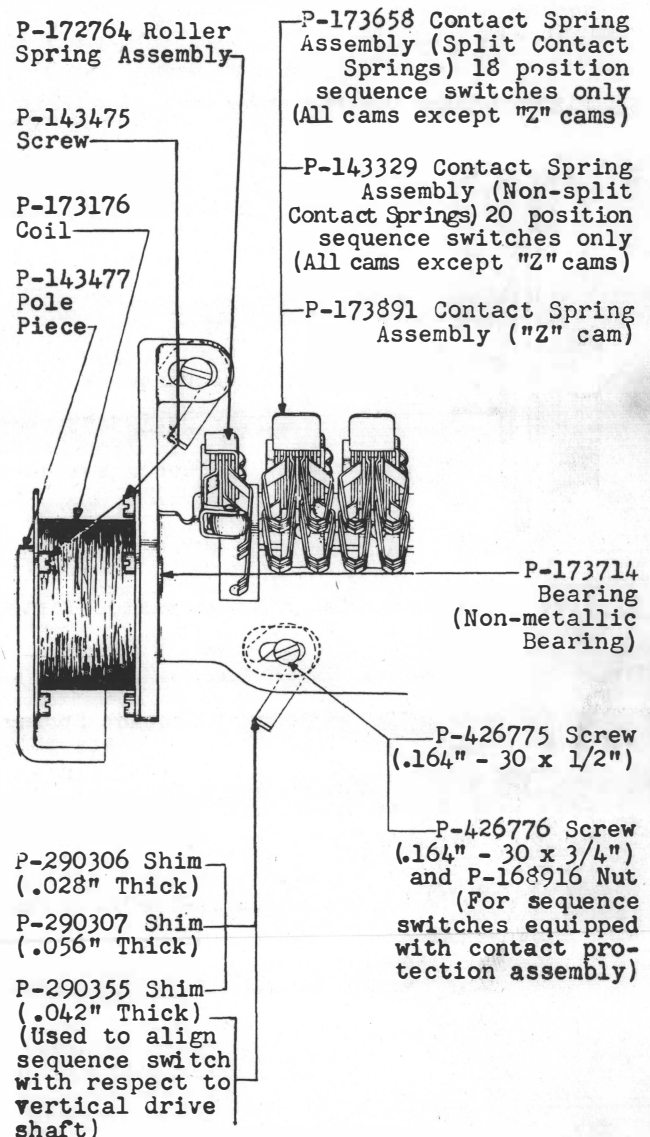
Contact Spring Assemblies, Drive Magnet, and Associated parts
